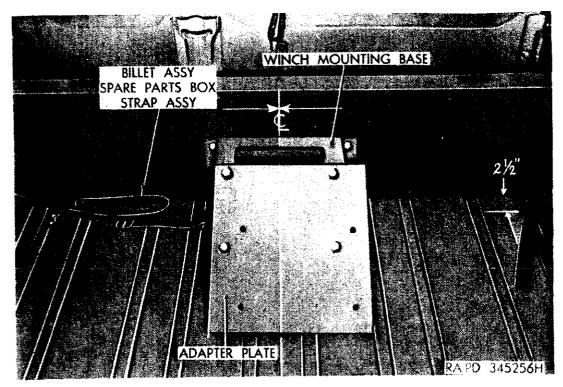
Superseded installation of winch mounting base assembly, adapter plate, and spare parts box strap assemblies.
